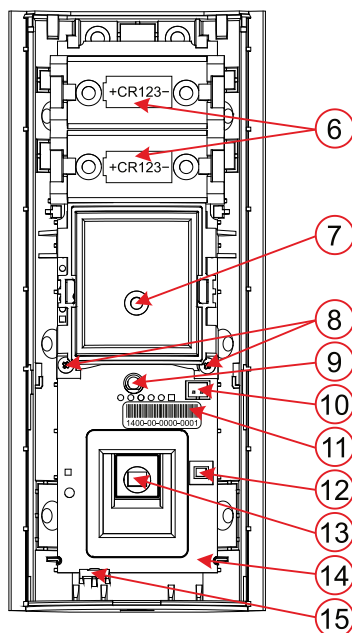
6 – Battery holder; 7 – GBS sensor; 8 – GBS module locking screws; 9 – LED indicator; 10 – external tamper connector; 11 – serial number; 12 – tamper switch; 13 – PIR sensor; 14 – PCB; 15 – PCB tab
